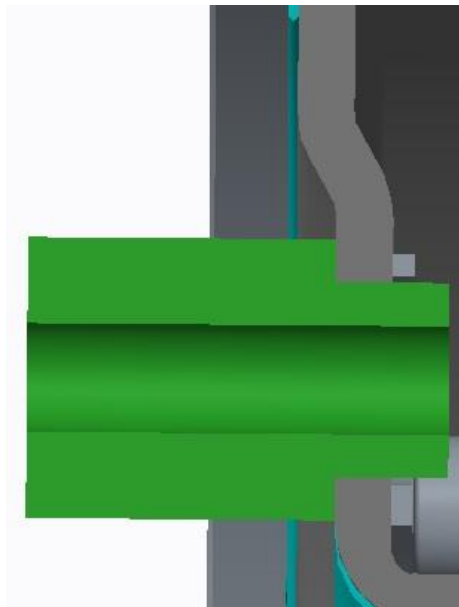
Fitting between ball transfer unit's adapter and DNR FWD piston
